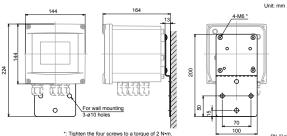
Housing dimensions and layout of glands (Plastic housing)
